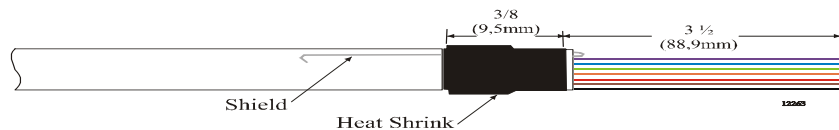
Seven-Conductor Control Head Cable Shield Wire and Heat-Shrink
